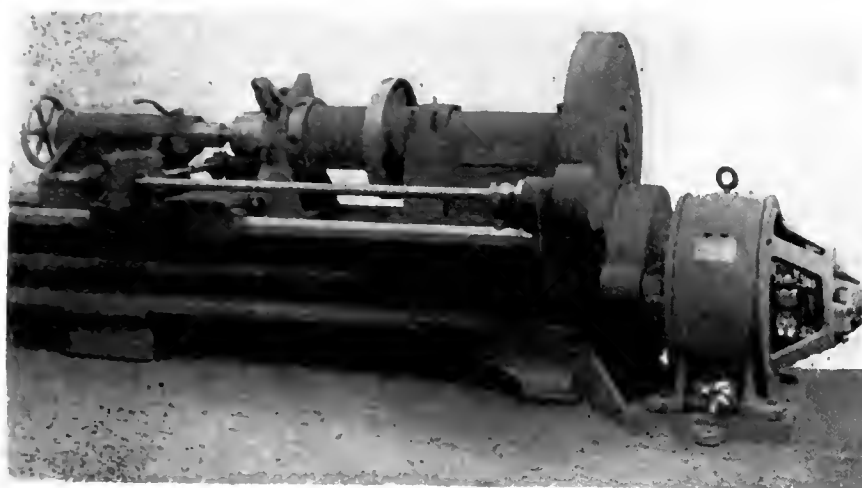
FIG. C. REAR VIEW SHOWING SHAFT DRIVE TO WAVING MECHANISM.
